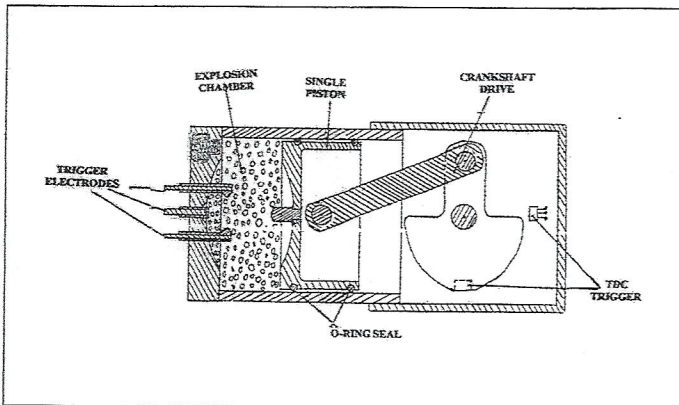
IECE single piston two-stroke crankshaft engine cross-sectional diagram.
